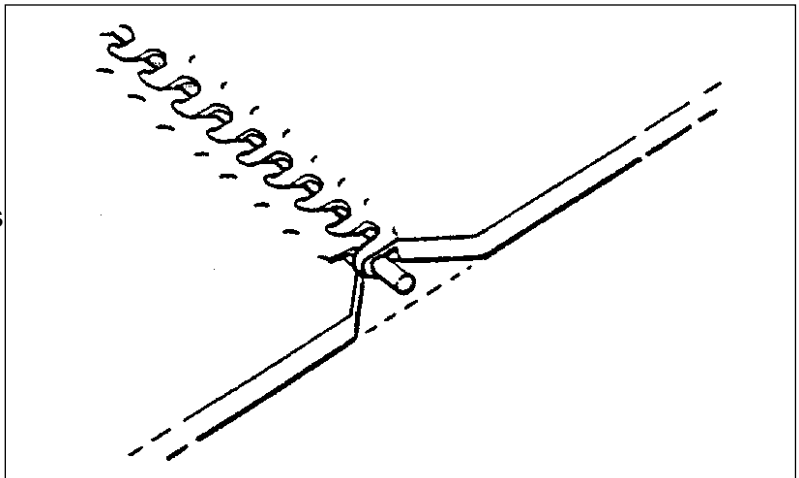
STEEL PIN INSTALLED, BELT EDGES ALIGNED
